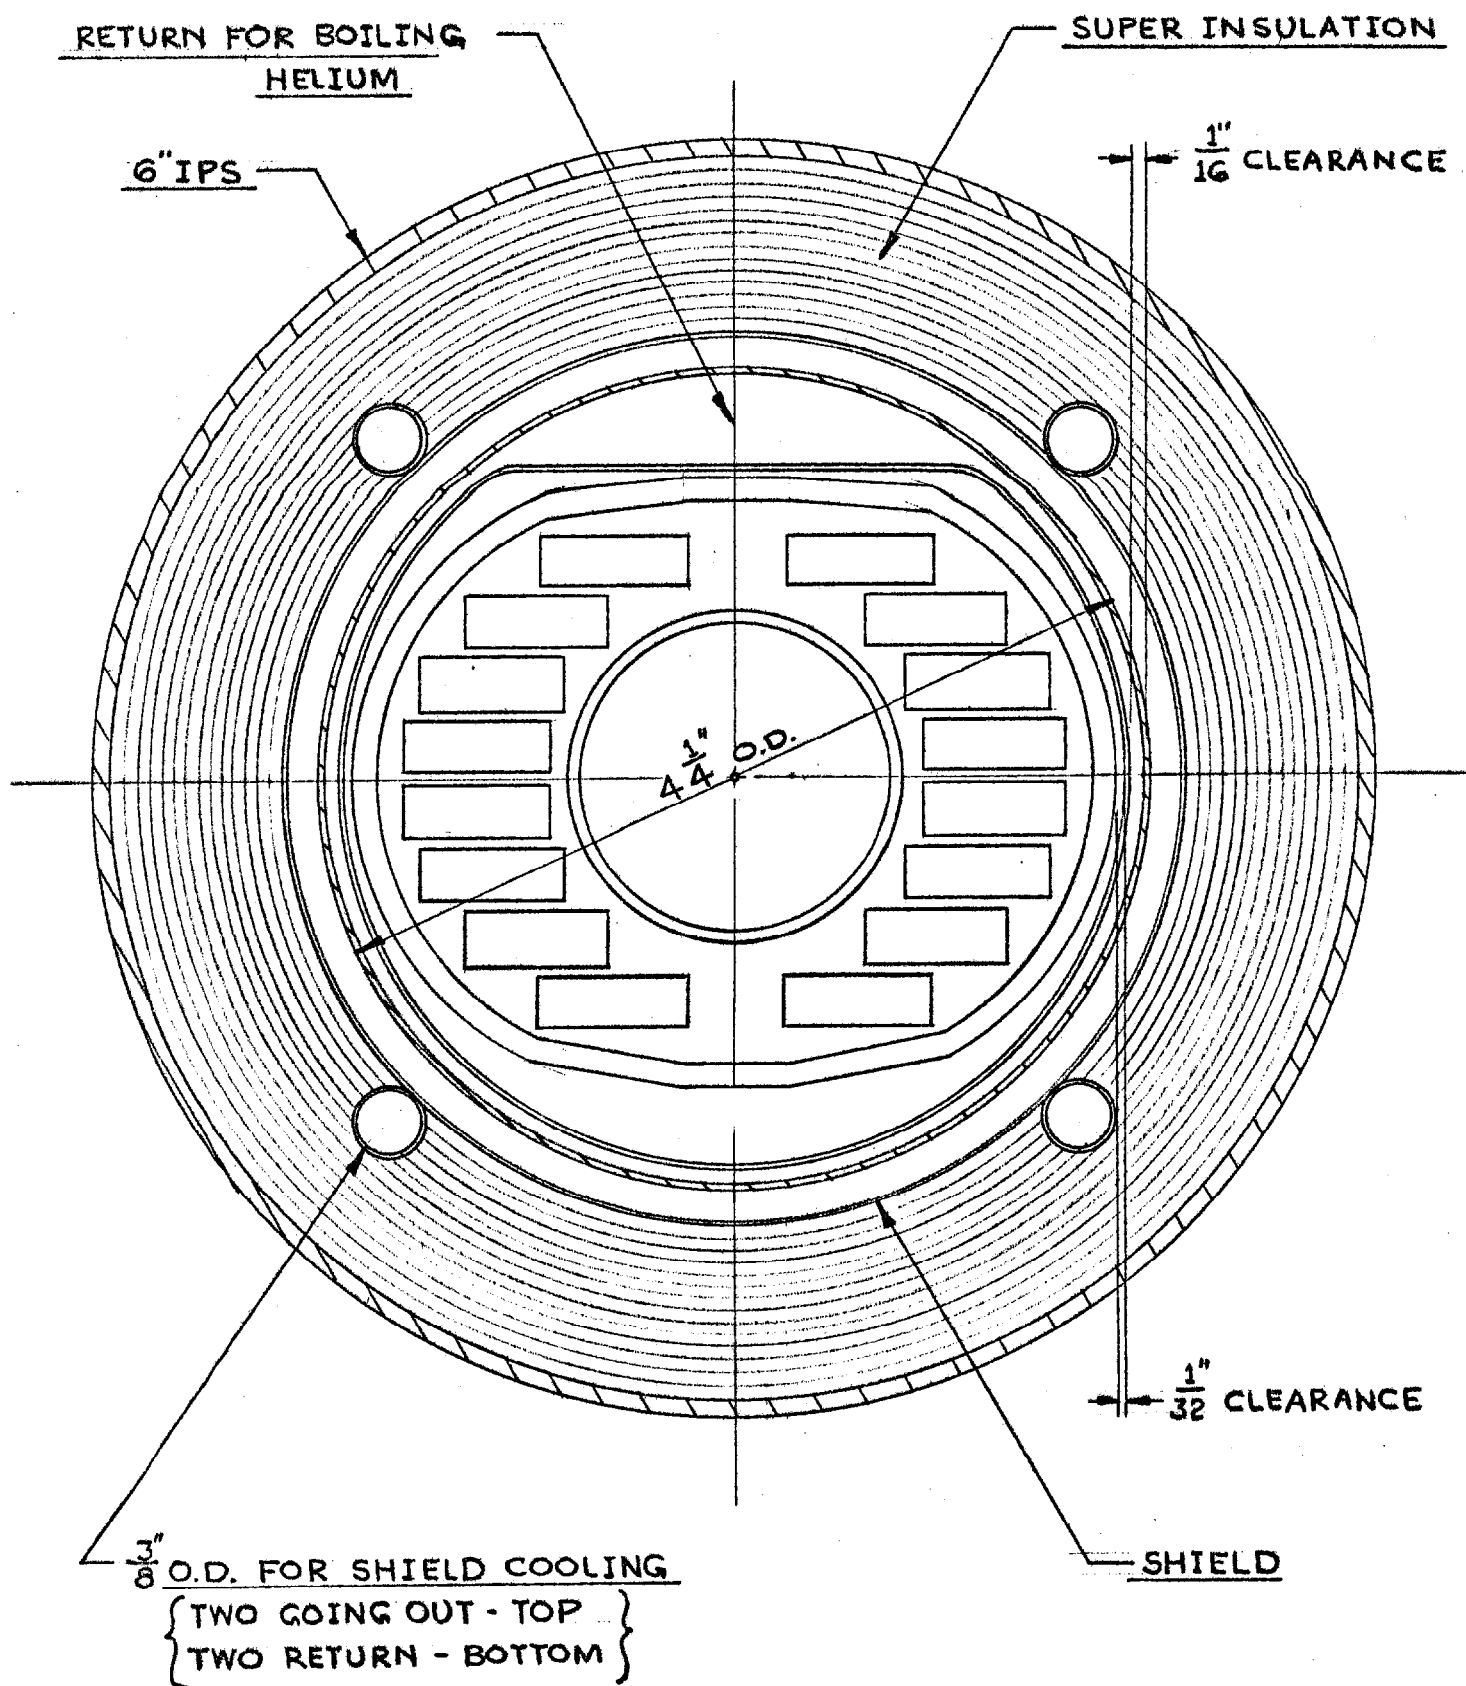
MAGNET ASSEMBLY CROSS-SECTION
